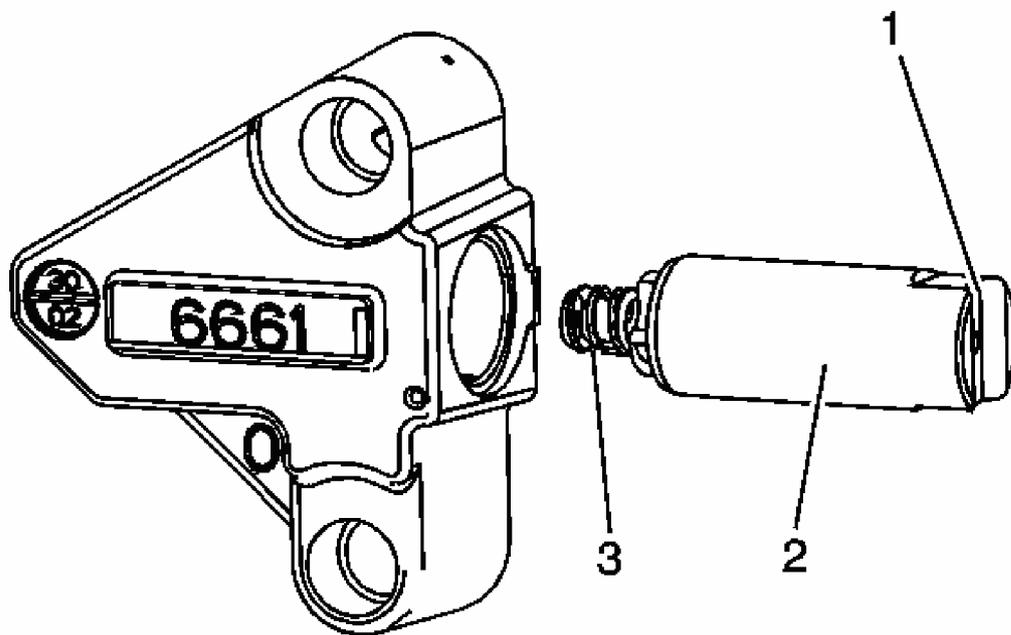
Checking Left Secondary Timing Chain Tensioner
